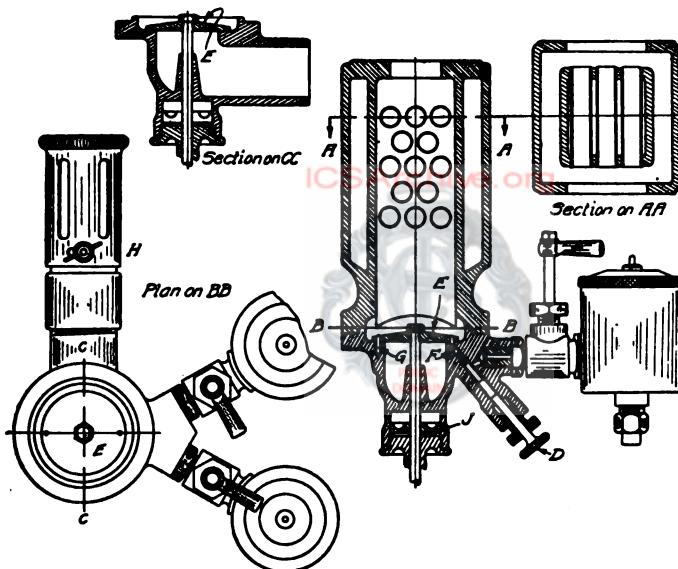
Sectional and Plan Drawings of the Davis Paraffin (Kerosene) Carbureter
